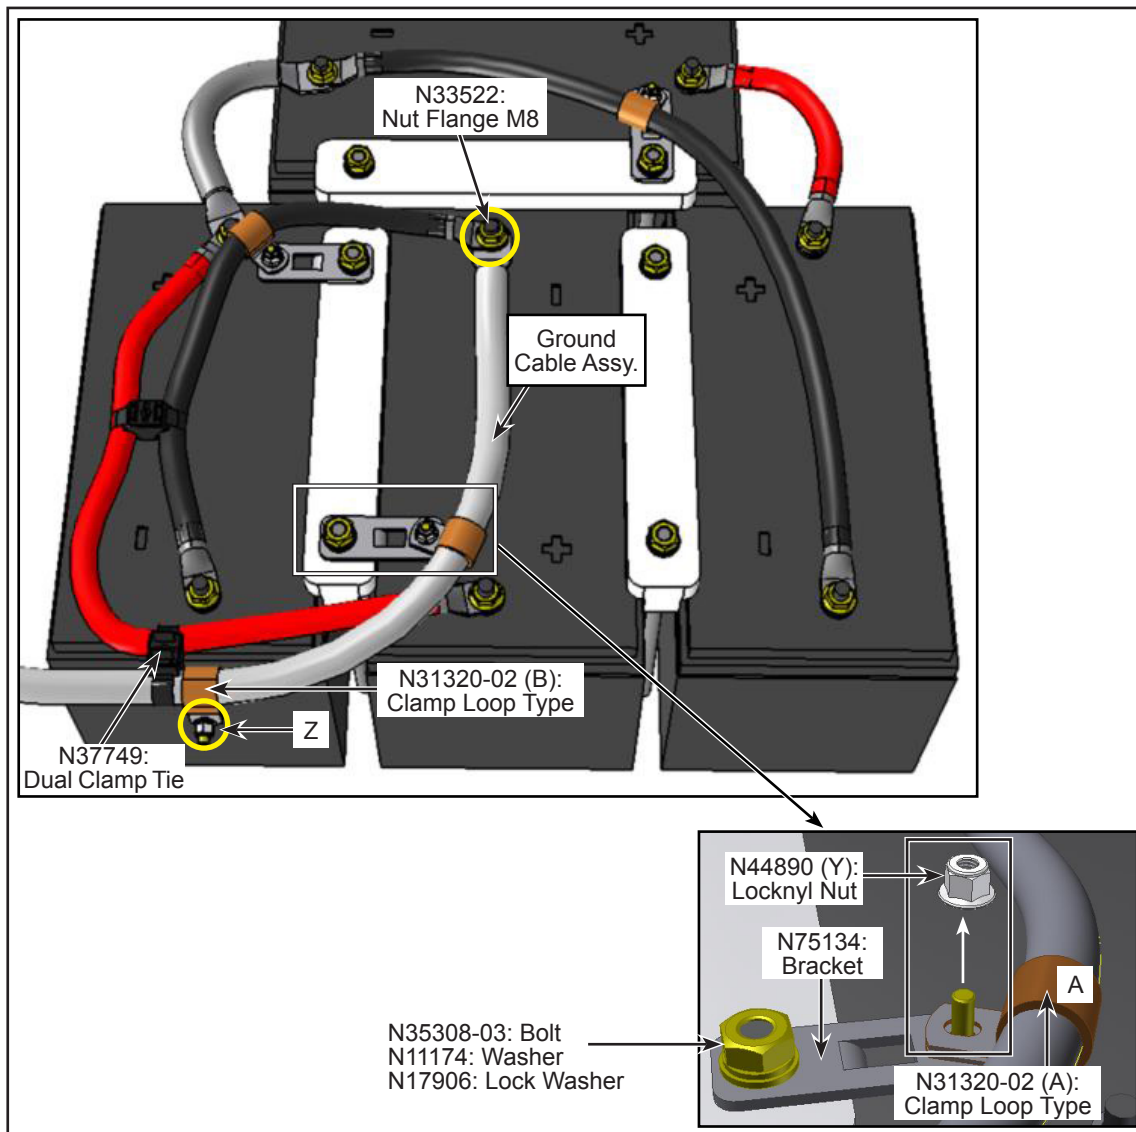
Removal of Ground Cable Assembly and its Accessories
